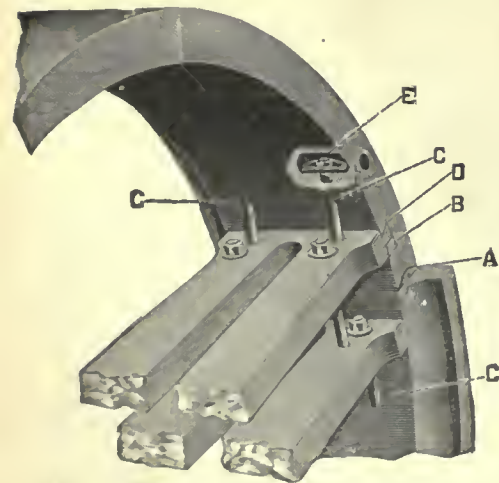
DETAIL OF CONSTRUCTION OF "DODGE" WOOD PULLEY.
